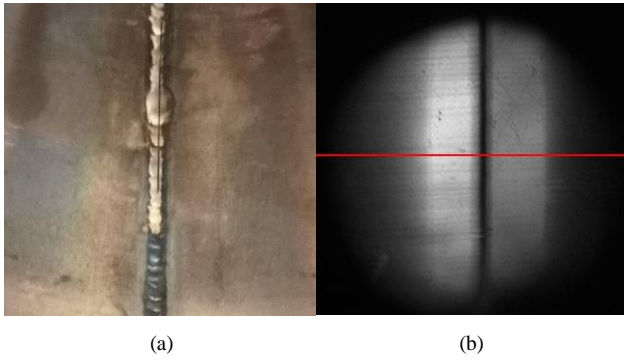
(a) Weld crack (b) Magneto-optic image
